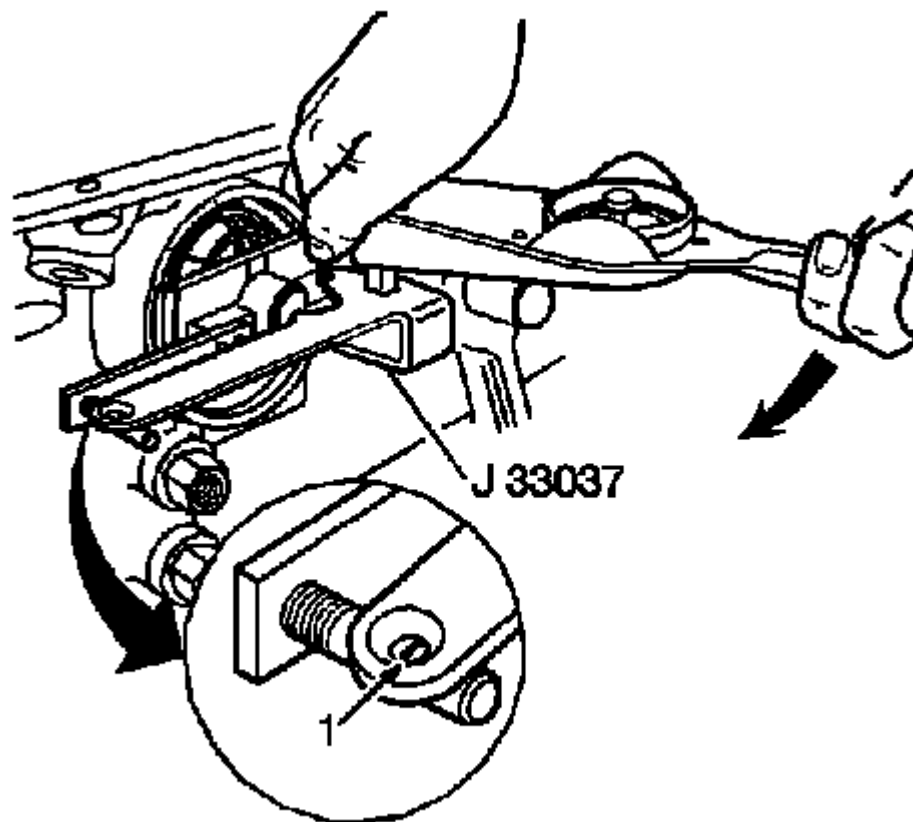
Shift Cable-To-Steering Column Bracket Retaining Clip
